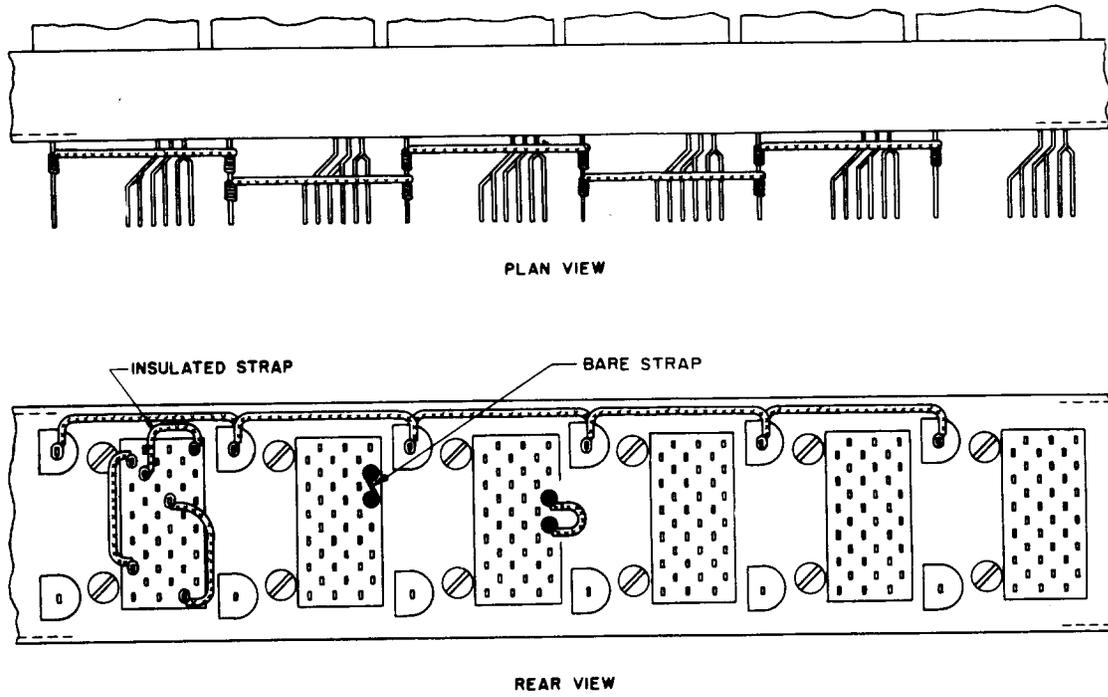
Straps on Wire-Spring Relays (General Purpose) Local Cable Wired
